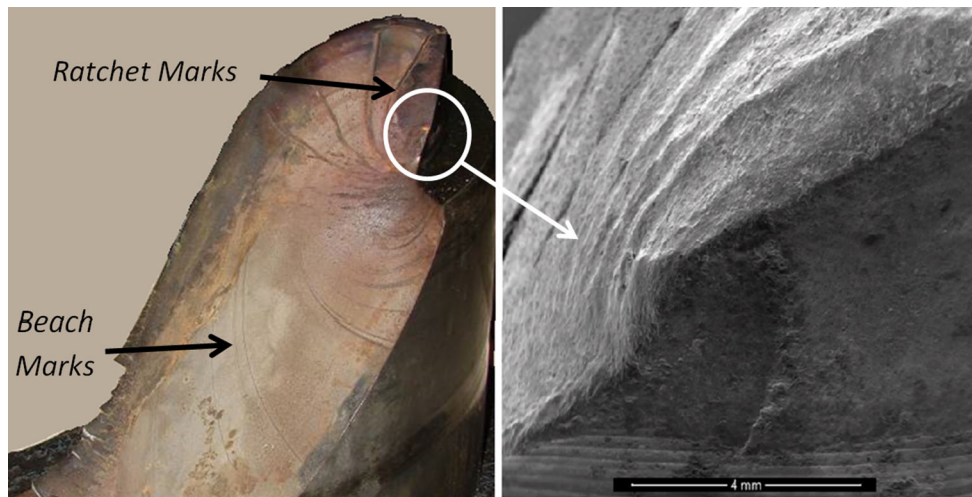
Left: shaft fracture surface where it is observed the pattern of fracture by fatigue. The beginning of fracture is indicated with a circle. Right: SEM image where the region of fracture origin is seen
